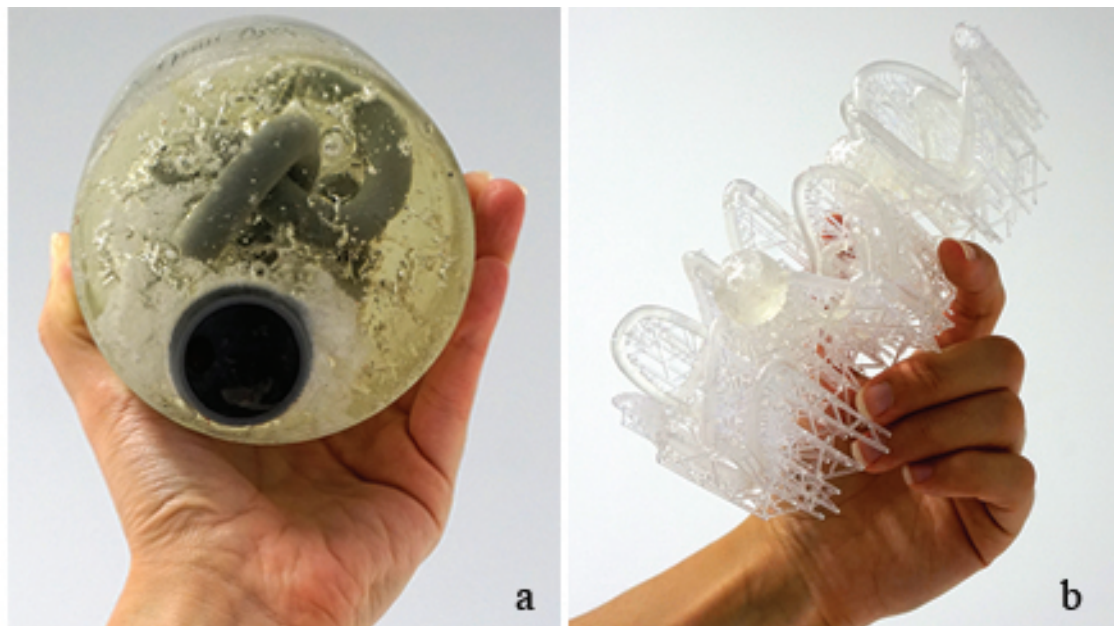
Examples of, a) molded sample ready for measurement, b) a faulty 3D print result.
